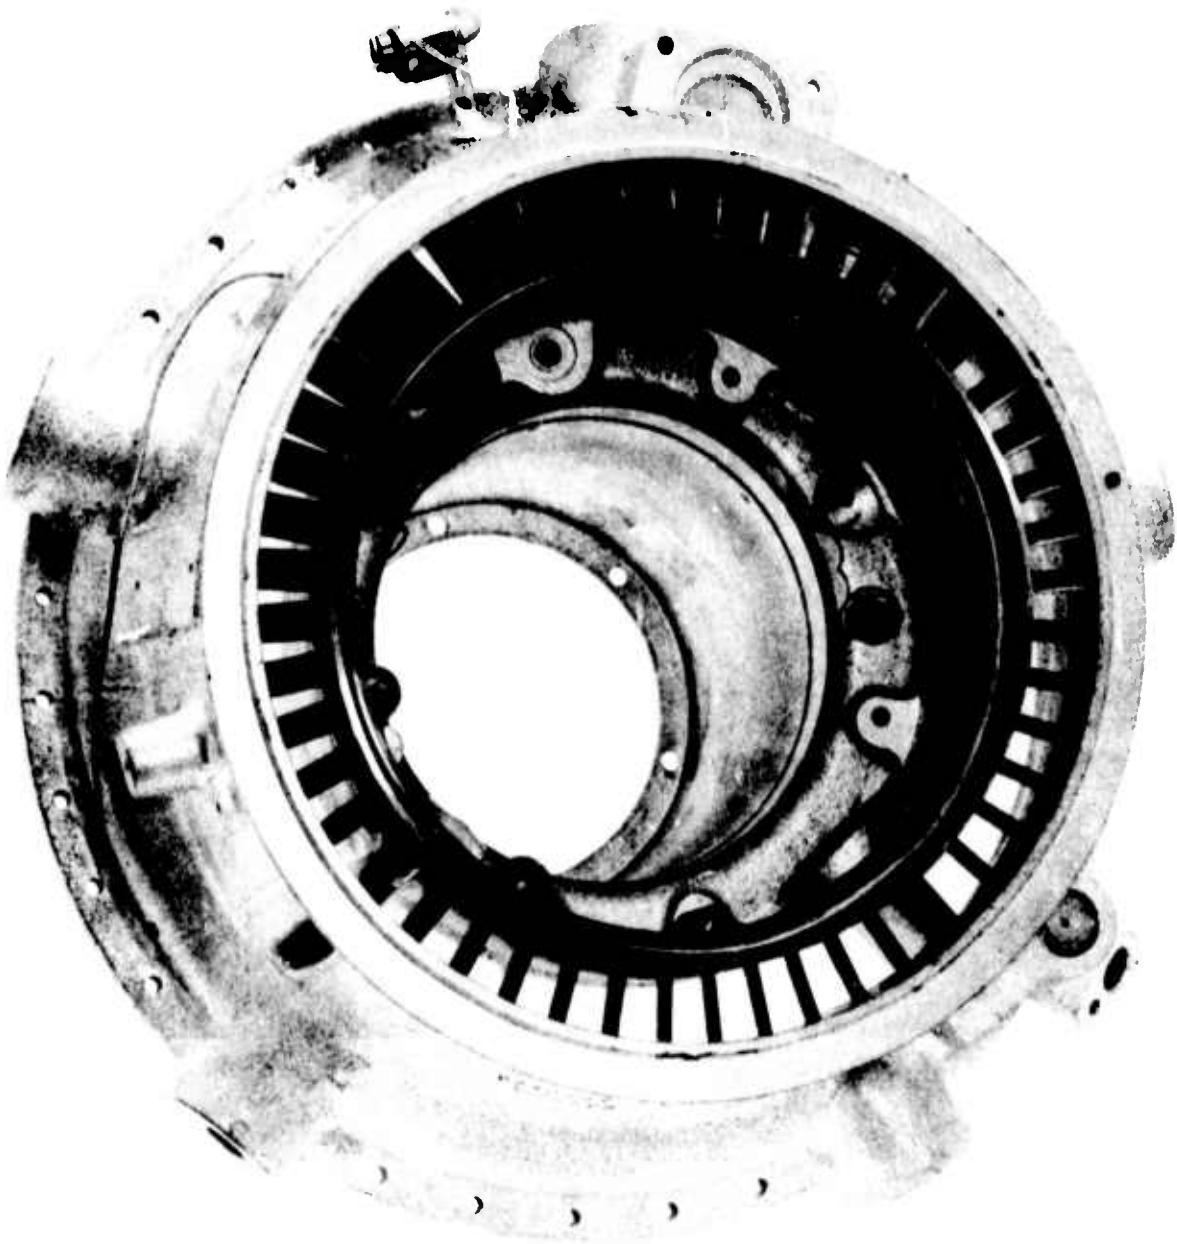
Forward End of Midframe. The Final Design is Shown in Figure 54.
